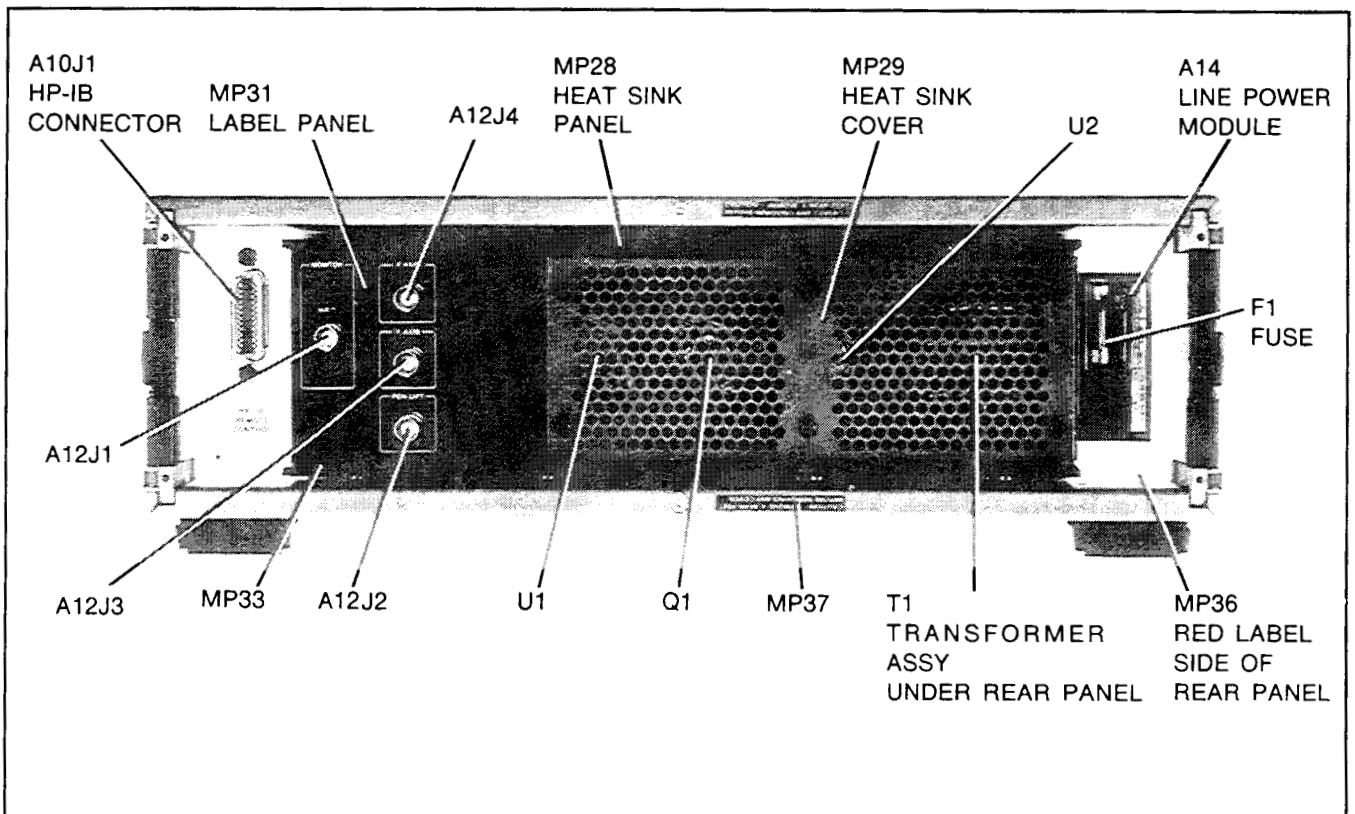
Chassis and Mechanical Parts Identification - Rear Panel (2742A and above)
